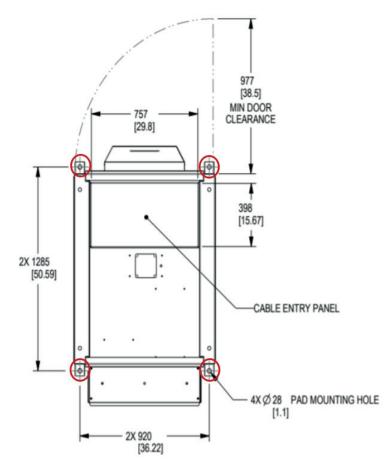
C-Cab XXL Anchor Foot Dimensions (units in mm [in])
